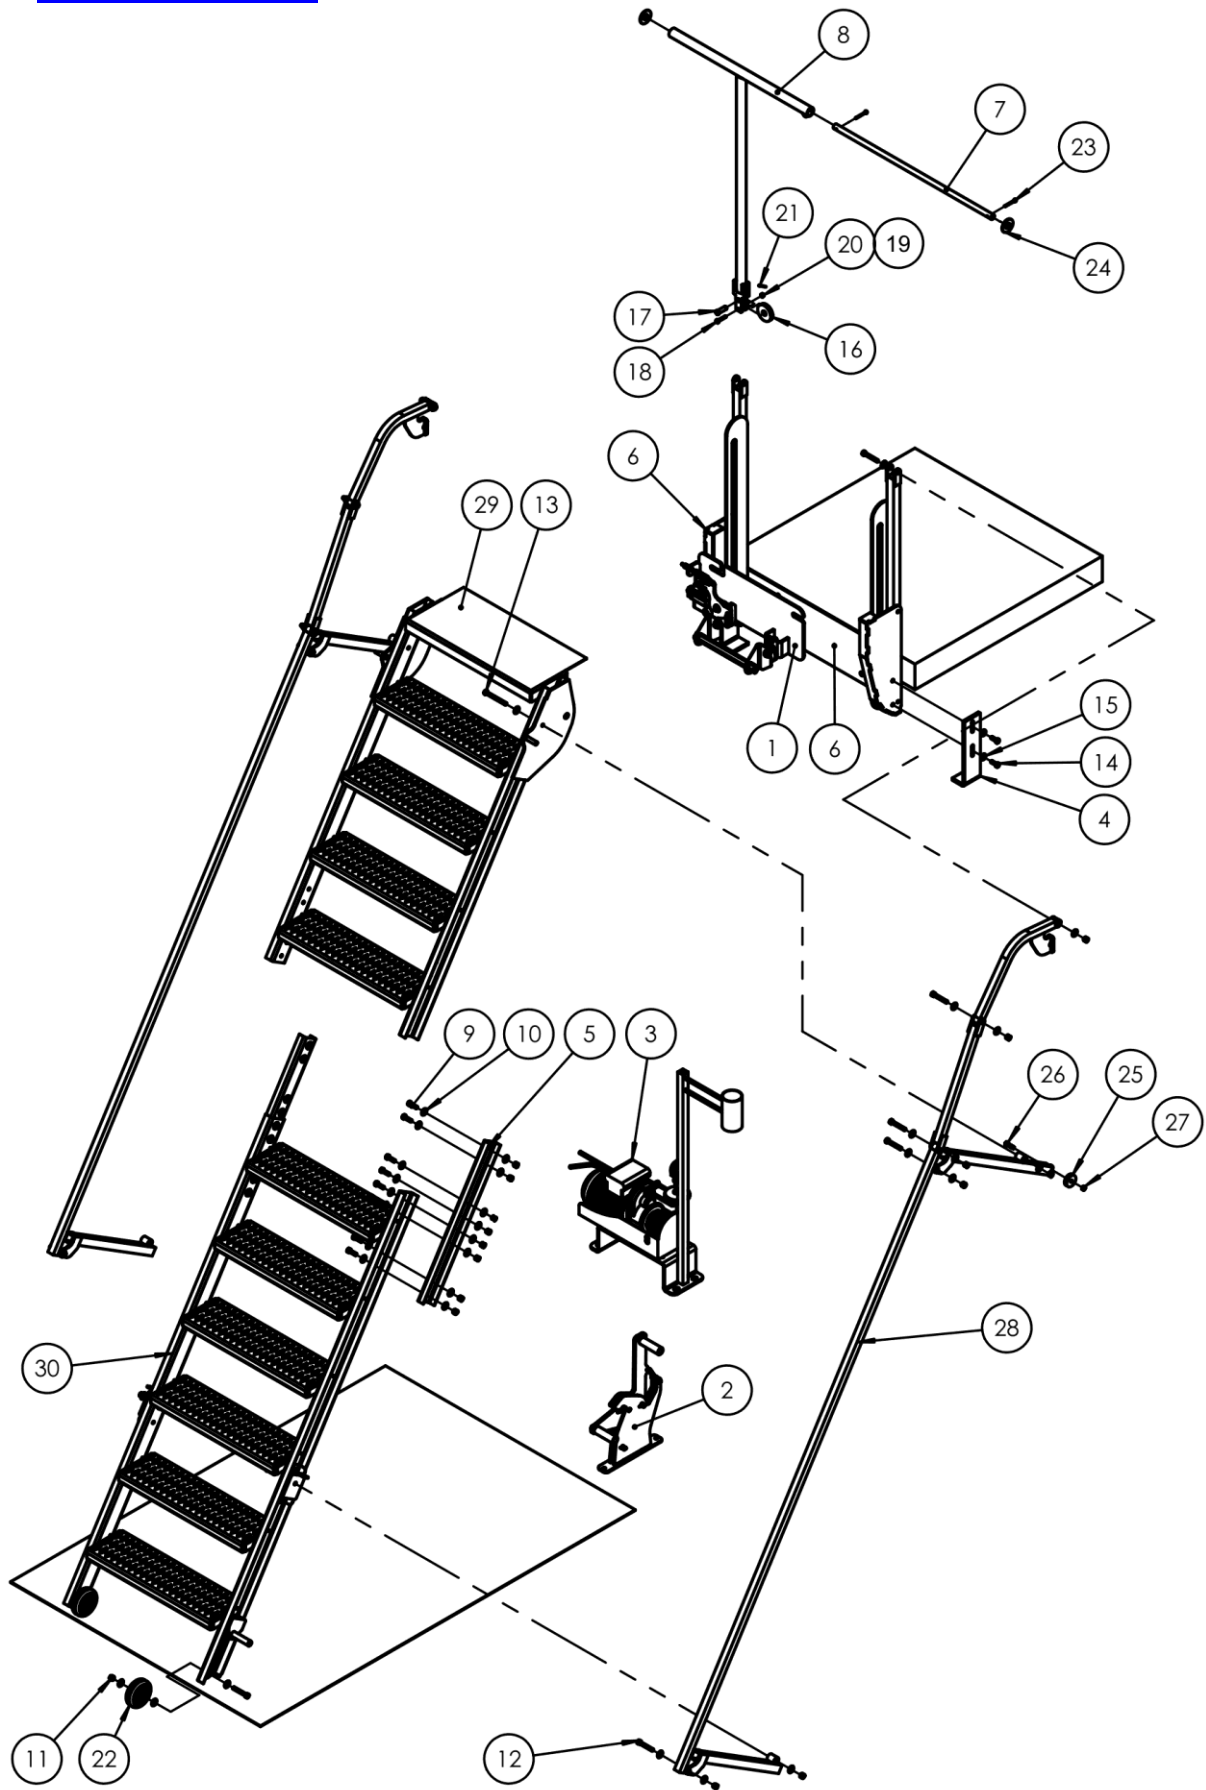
LAD-FM-108-PSO EXPLODED VIEW (44-006-714)
